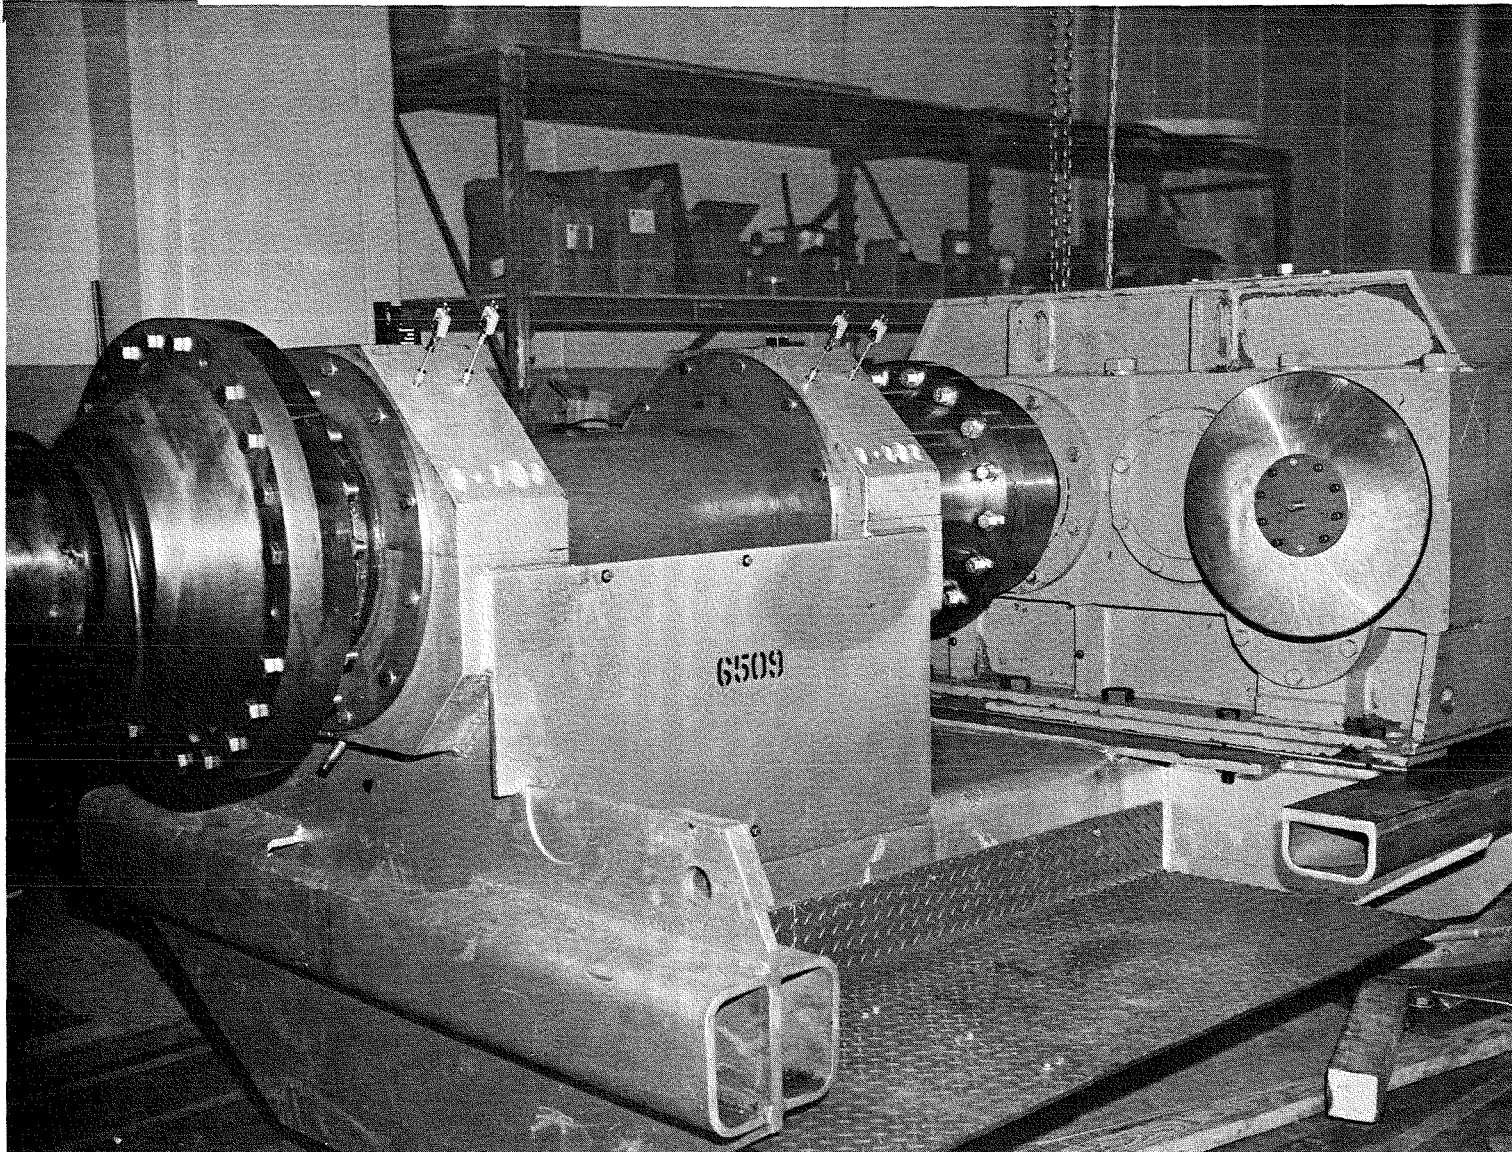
Low Speed Shaft, Bearings, Bearing Housings, and Couplings
